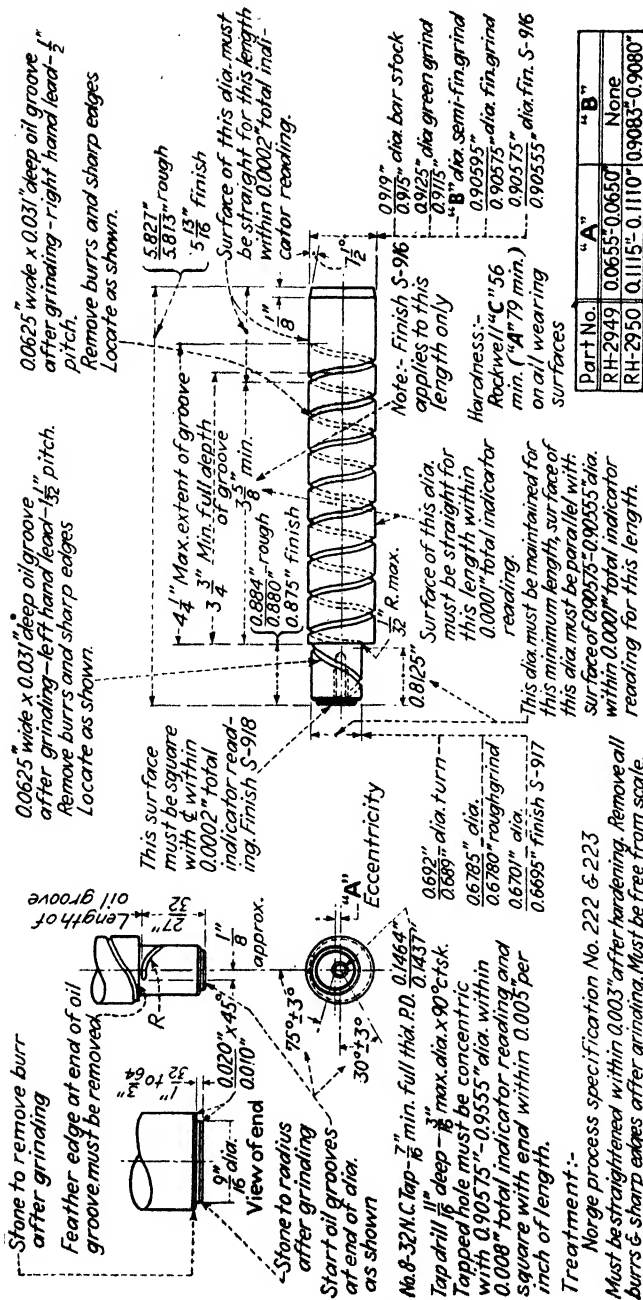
This unusual eccentric shaft (for a refrigerator compressor) is turned with the eccentric diameter and longer of the two oil grooves in a multiple-spindle screw machine at the rate of about 1,100 pieces in 8 hr. Special tooling, including the use of reciprocating rough and finish turning tools for the eccentric and of a milling cutter to form the oil groove on the eccentric as well as the tapped hole in that end require supplementary operations, as does the precision grinding of the two diameters. Especially noteworthy are the specific instructions that the drawing contains, even though the part is produced within the plant of the maker of the compressor. The shaft is machined from S.A.E. 4620 steel and is heat-treated after machining but before grinding.
